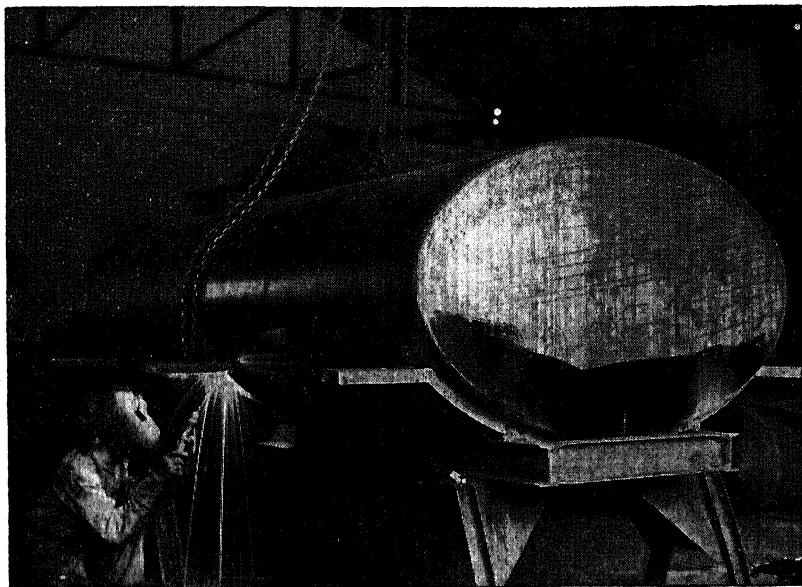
Building a truck tank for transportation of gasoline. Shielded arc welding is used almost exclusively for such equipment.
